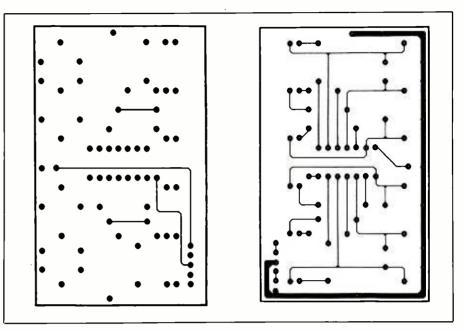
Actual-size etching-and-drilling guides for top (left) and bottom (right) of double-sided printed-circuit board.
